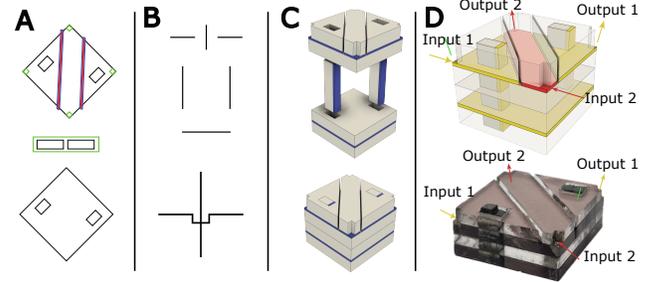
A multilayer PCB, built from 4 individual pieces connected by laser-cut bridging joints. The SVG file has four parts: the top layer, two legs that bridge the layers, and the bottom layer (A). Before assembly, the parts create 6 separate circuits, but after assembly there are two independent coplanar connections (B). The pieces slide together vertically into a single assembly (C), which creates two independent input/output pairs from corner to corner (1 is yellow, 2 is red, D).
